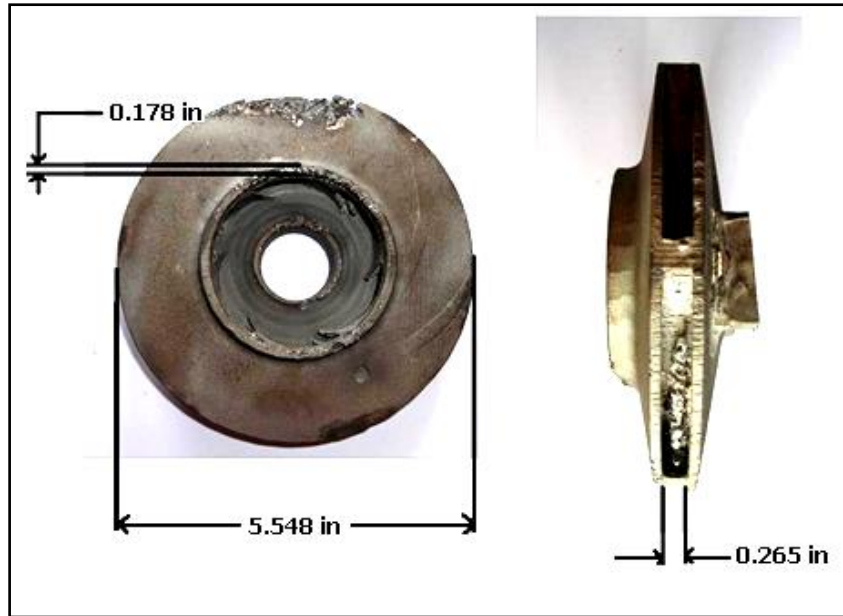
Investment Cast Impeller, Complete with Dimensions
